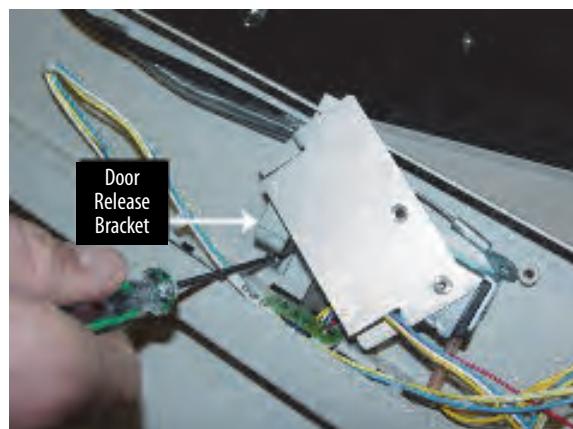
Removing the door release bracket: 6-32 truss head screw
